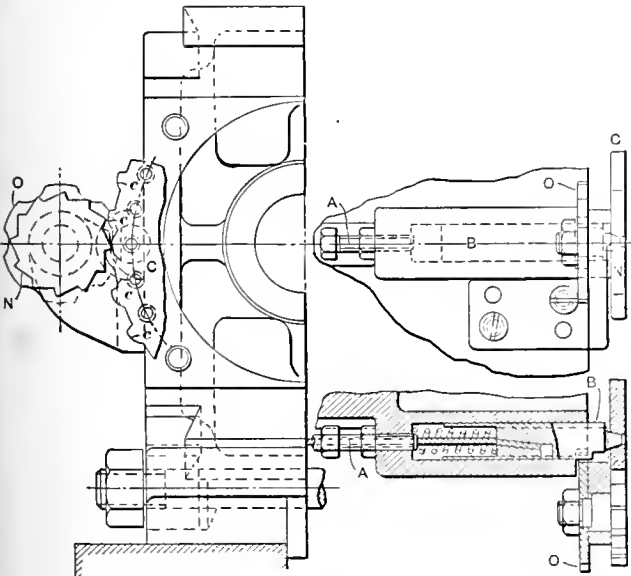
Detail showing the Locking Mechanism and Plates which control its Movement
